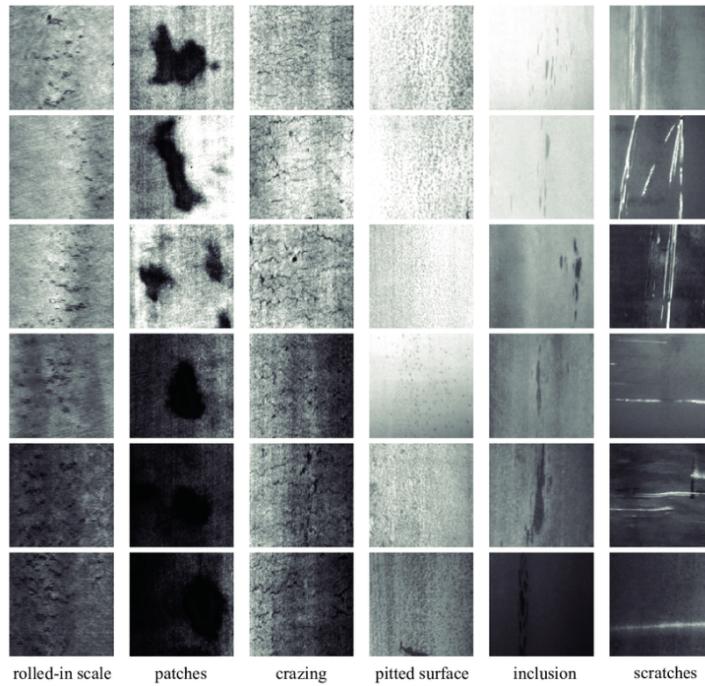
Steel Sheet Metal surface defect detection using Deep learning.
